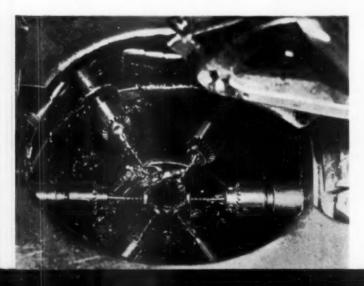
, top view with guards removed, showing fixture and six spindles with chucks and drills in working position.
